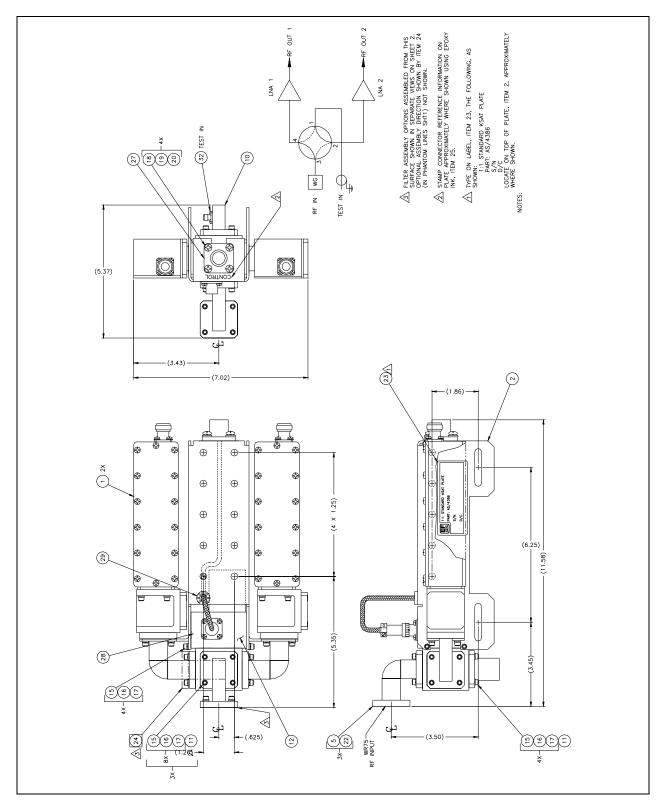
Dimensions for 1:1 Redundant LNA Plate
